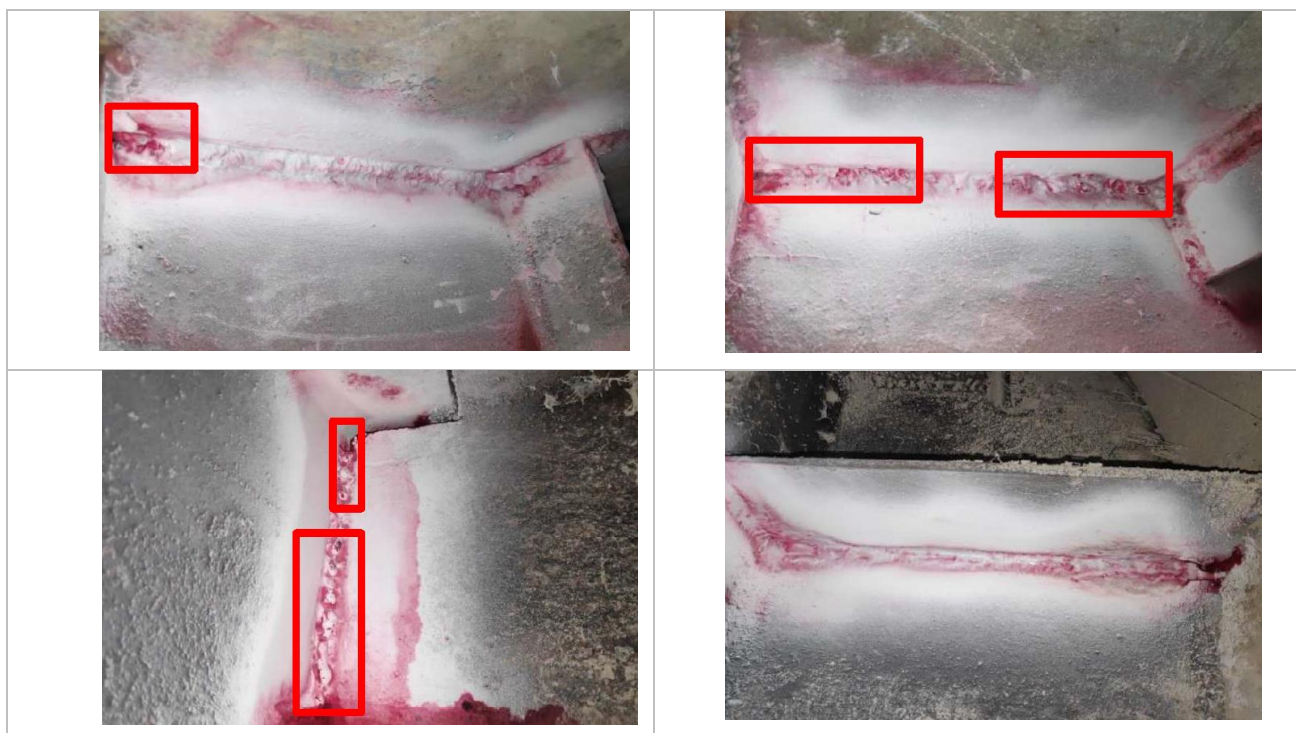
Dye penetrant inspection (beam and column structure)
